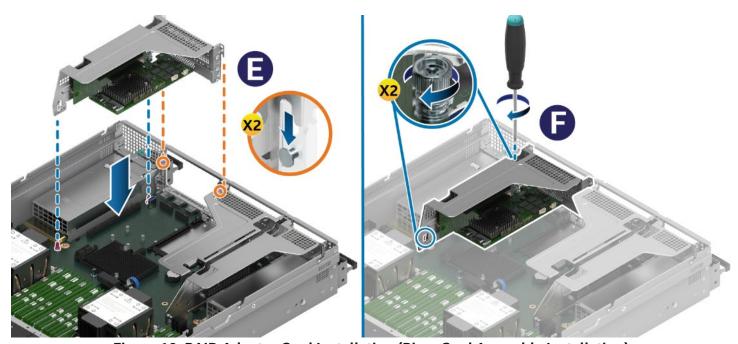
RAID Adapter Card Installation (Riser Card Assembly Installation)
